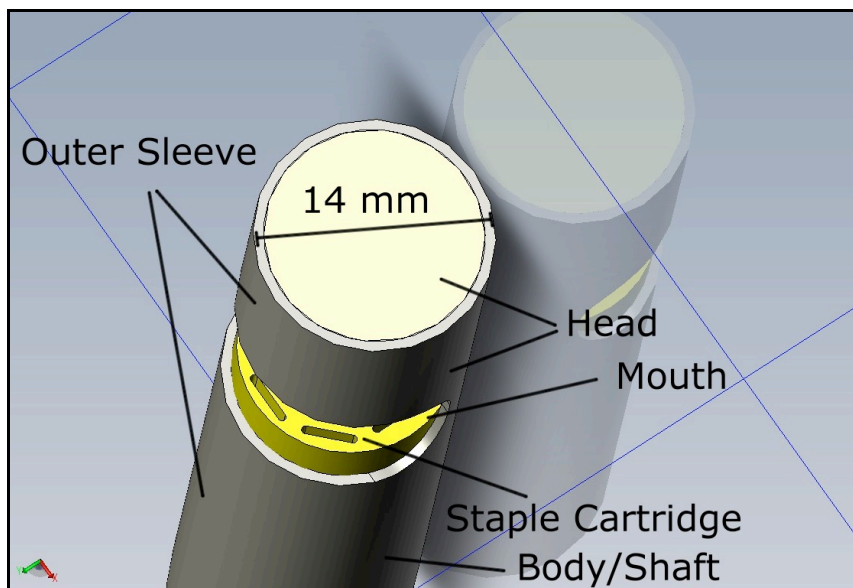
Design drawing: The head and outer sleeve of Prototype Instrument 3
